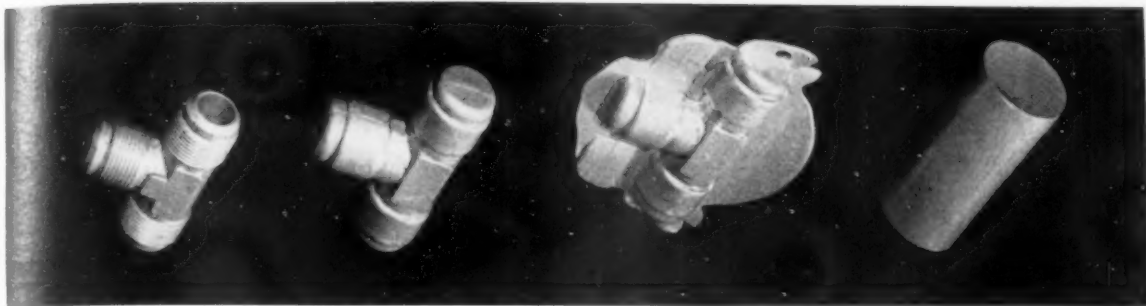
Steps in manufacture of magnesium fitting showing correctly sized slug (left), as forged with flash, trimmed and machined.
